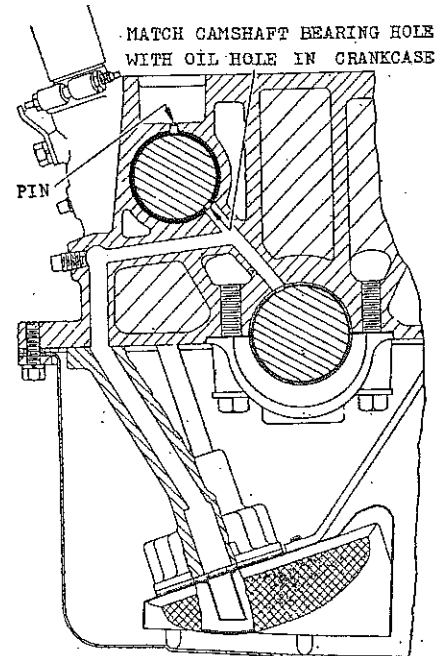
Installing camshaft bearings on 239, 257, 286, 331, 400 and 450 engines
